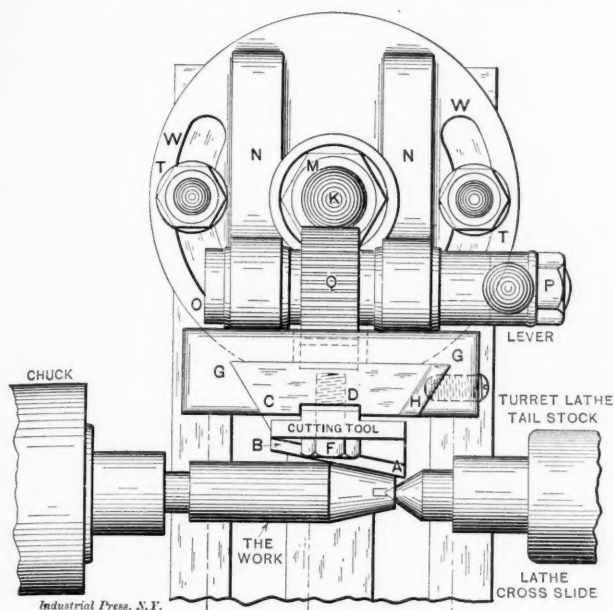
Plan View of Fixture showing its use for Machining the Taper Ends of Steel Tool-Posts.
